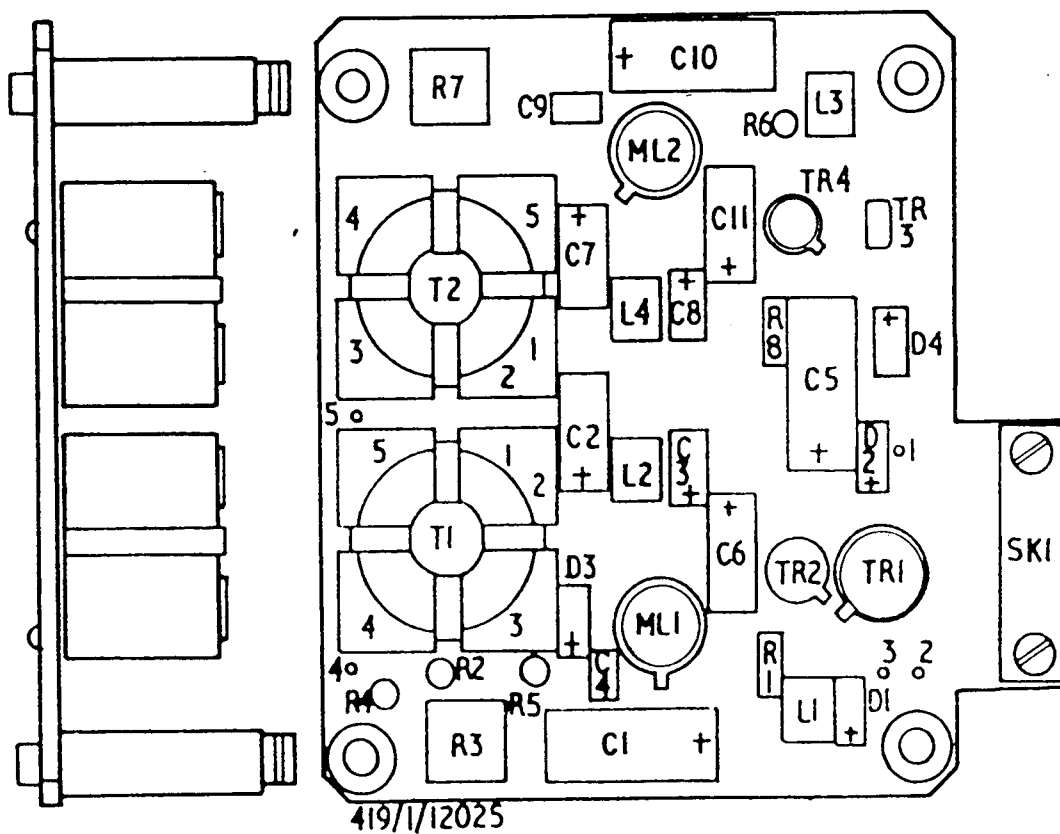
Panel, electronic circuit, ( unit 5a) - component layout
